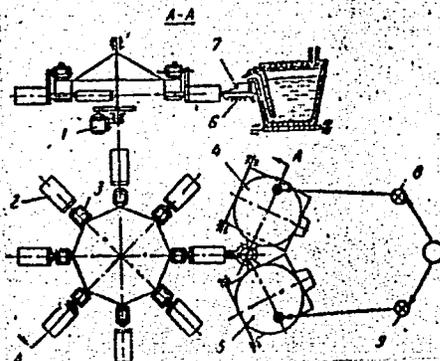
1--drive for the rotating assembly; 2--metal casting mold; 3--drive for the molds; 4 and 5--hermetically sealed ladles; 6--electromagnet; 7--guide trough; 8--regulator valve for ladle 4; 9--regulator valve for ladle 5
